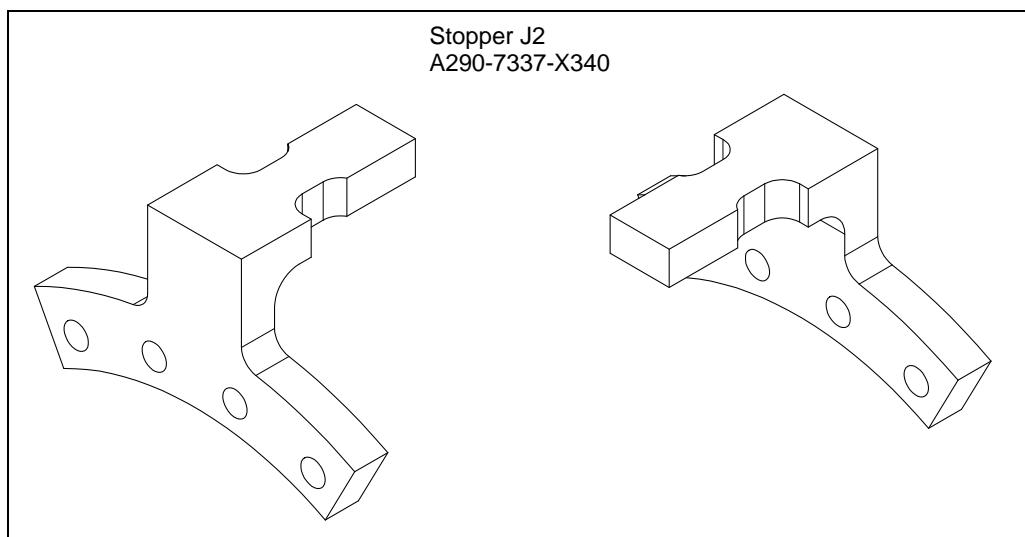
(m) J2-axis adjustable mechanical stopper (option)
